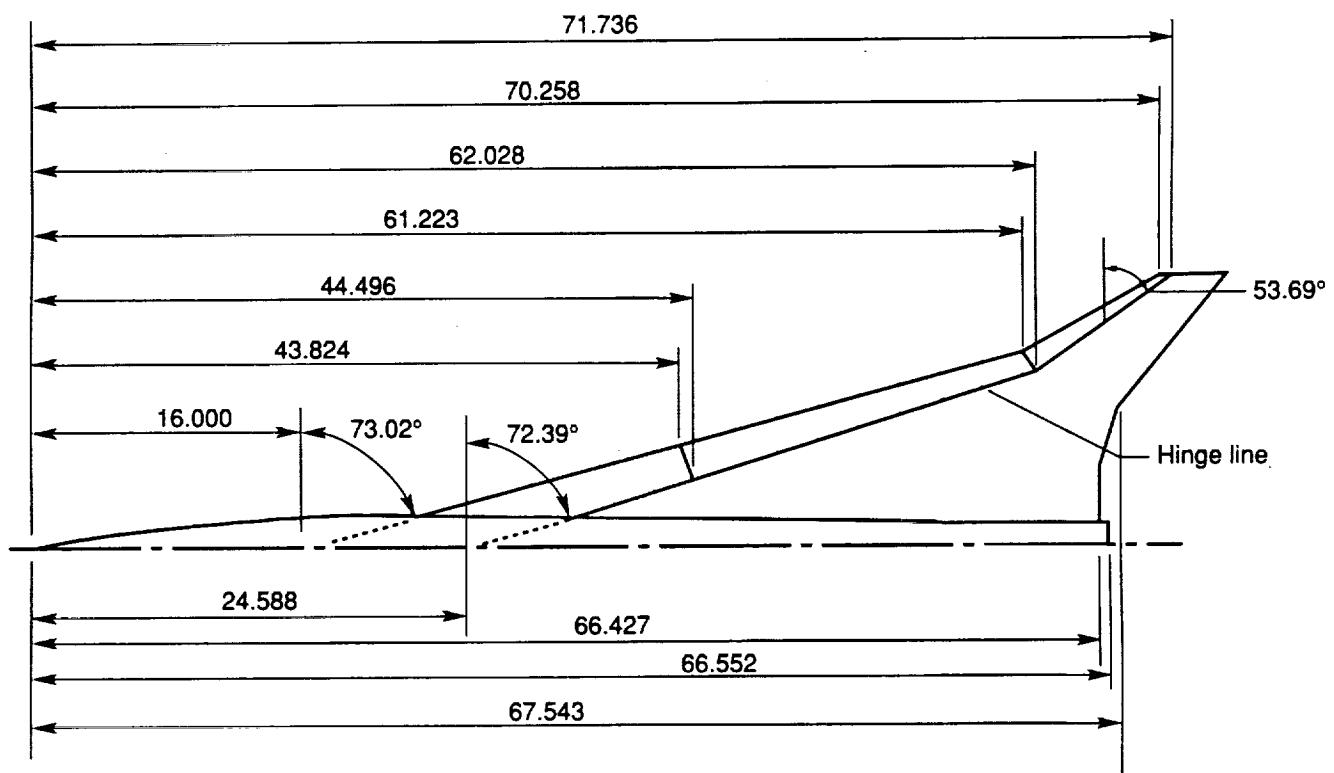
Details of leading-edge flap system. Dimensions are given in inches.
